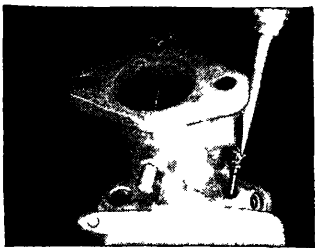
Remove low speed jet, and copper washer from casting. On some carburetors, low speed jet is pressed in place and cannot be removed
